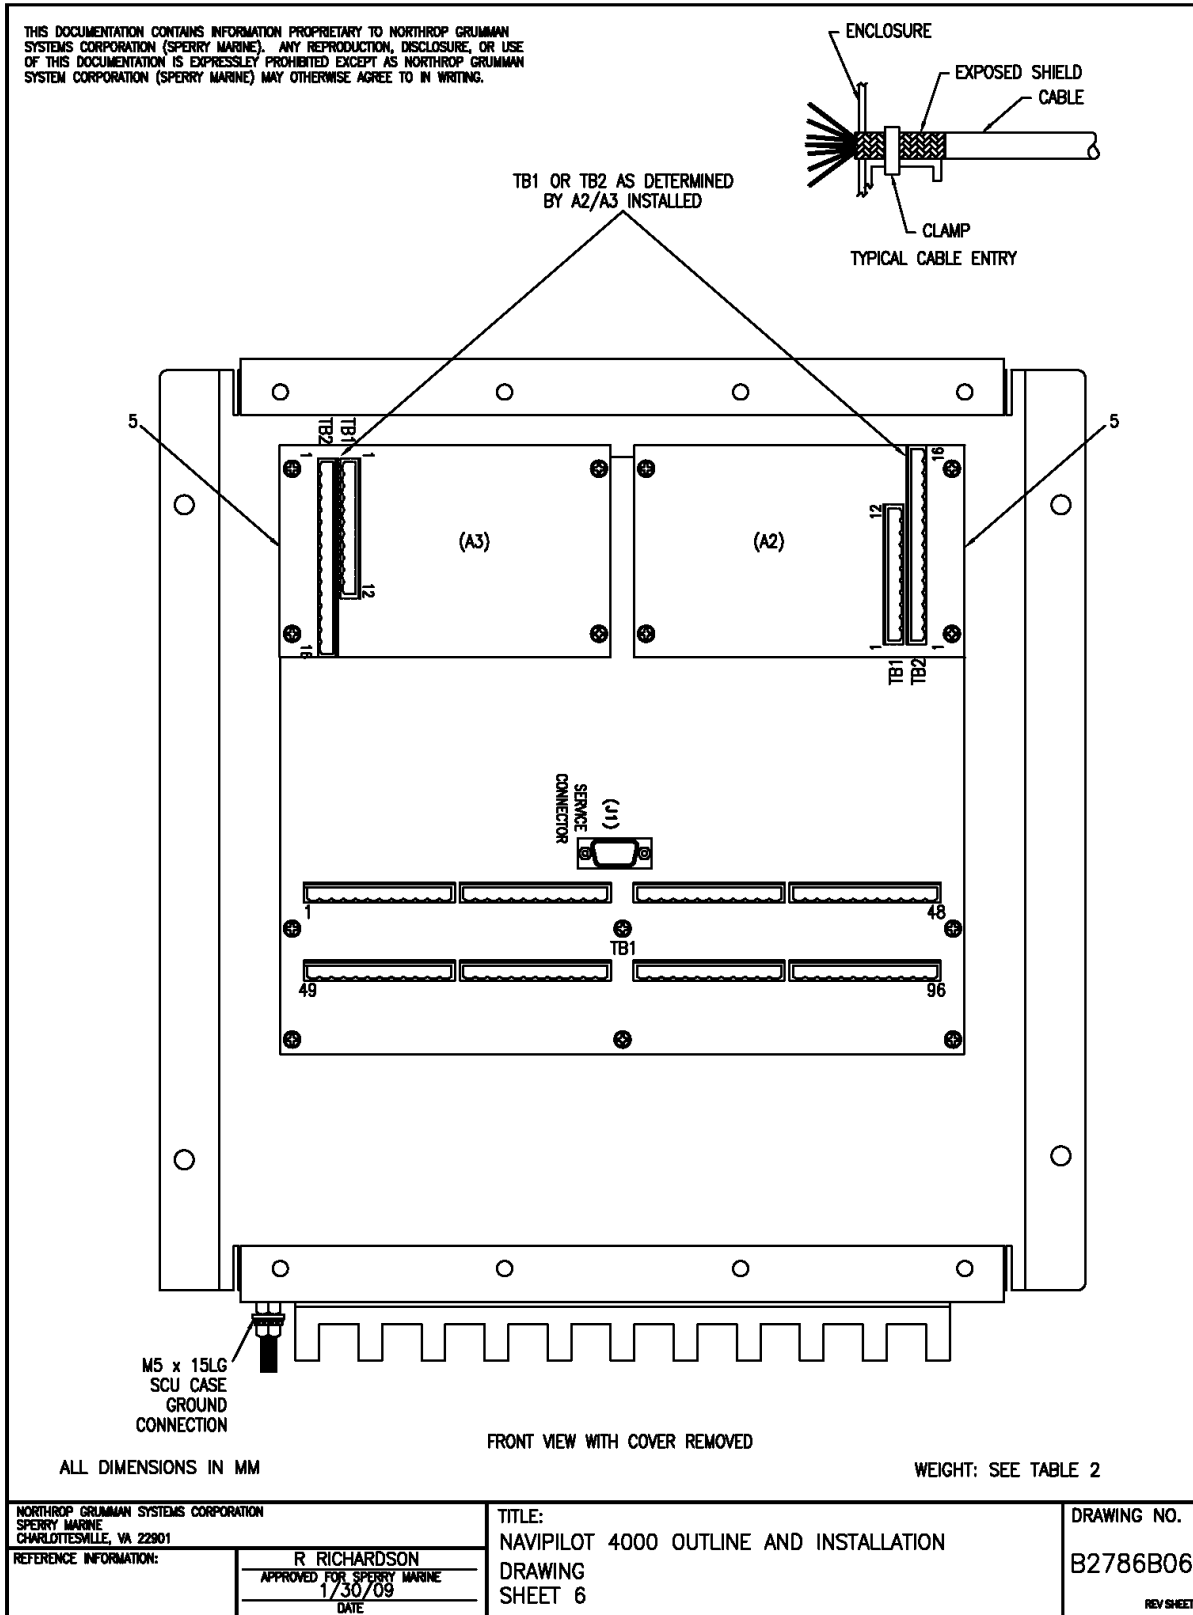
Outline and Installation Drawing (sheet 5 of 6)
